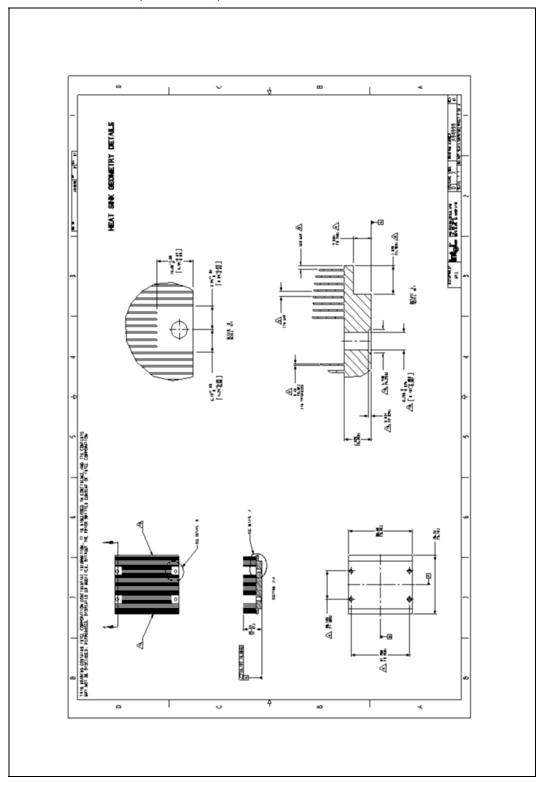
1U CEK Heatsink (Sheet 3 of 4)
